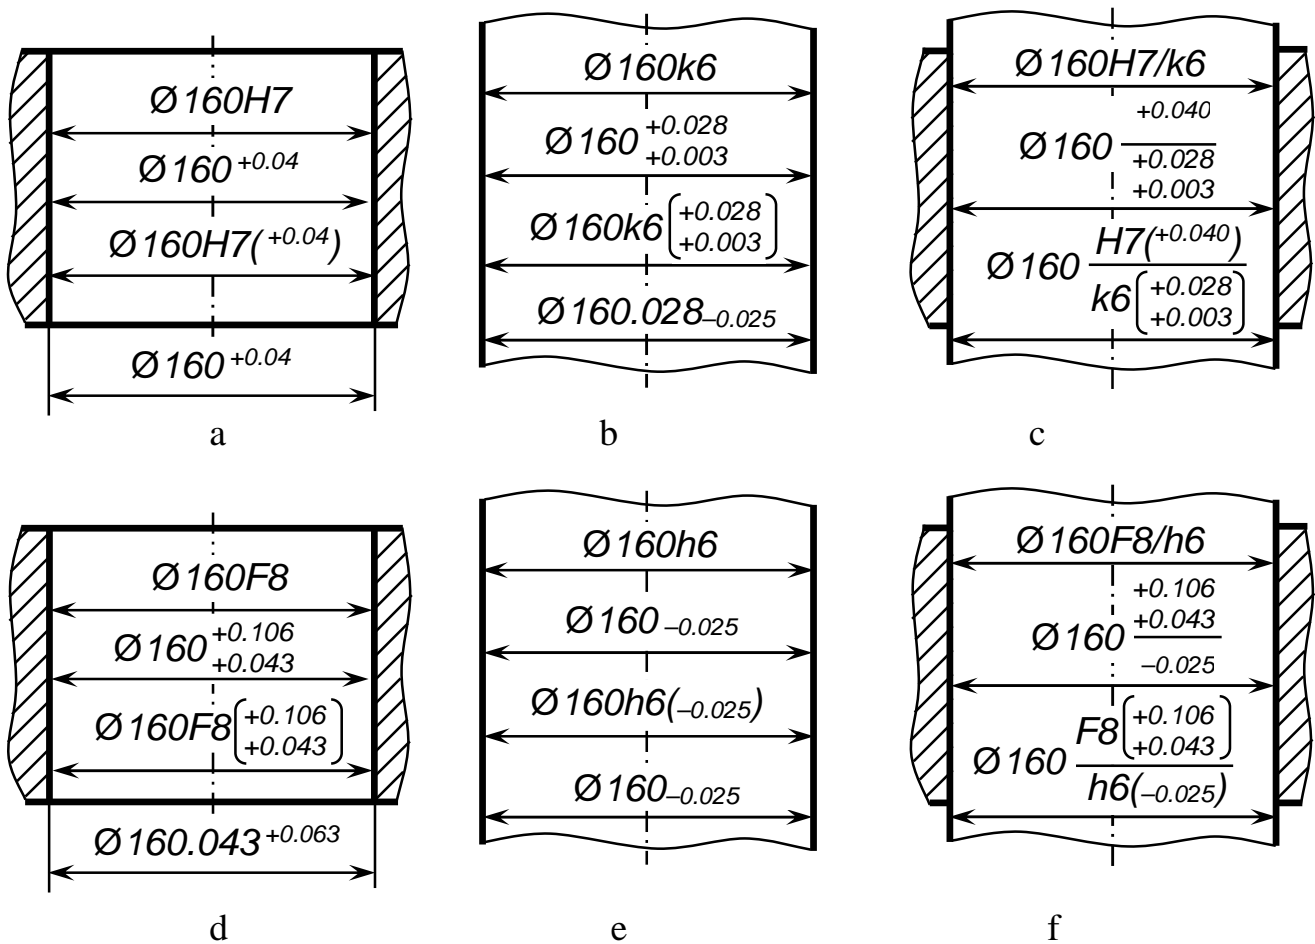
Specifying dimensions in drawings and operation sketches for holes (a, d), shafts (b, e) and for assembly units (c, f) in system of hole and in system of shaft
